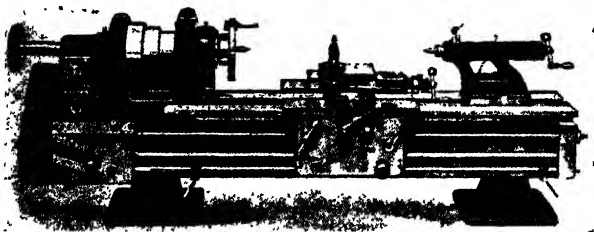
A 4-in. Centre Holbrook Bench Lathe with Sliding, Surfacing and Screw-Cutting Motions.
